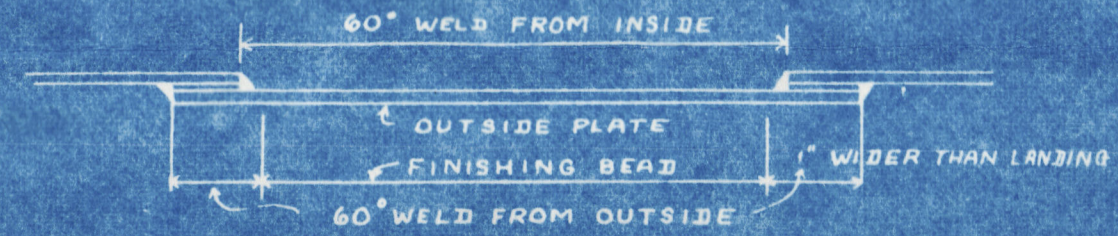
PLATES TO BE VEE'D OUT TO A 60° INCLUDED ANGLE FOR ALL BUTT WELDS AND BEVELED TO WITHIN 1/8" FROM BOTTOM PLATE. GAP OF 1/8" TO BE KEPT BETWEEN EDGES TO BE WELDED.
